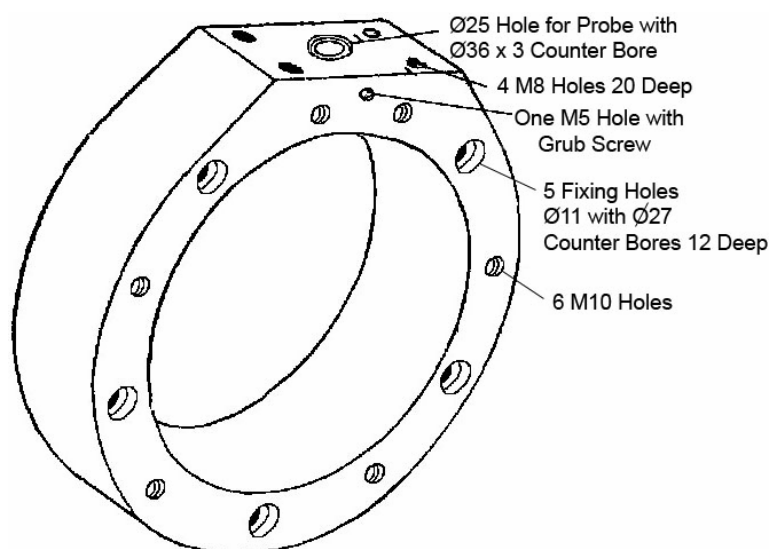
Original Design – Steel to Drawing B1-A0-9000385
